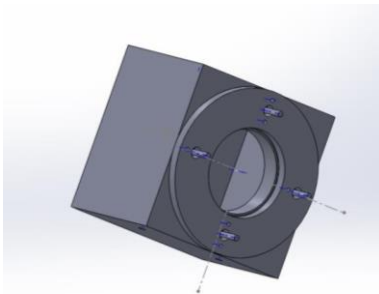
Cooling chamber welded with stainless steel disk and bolts
